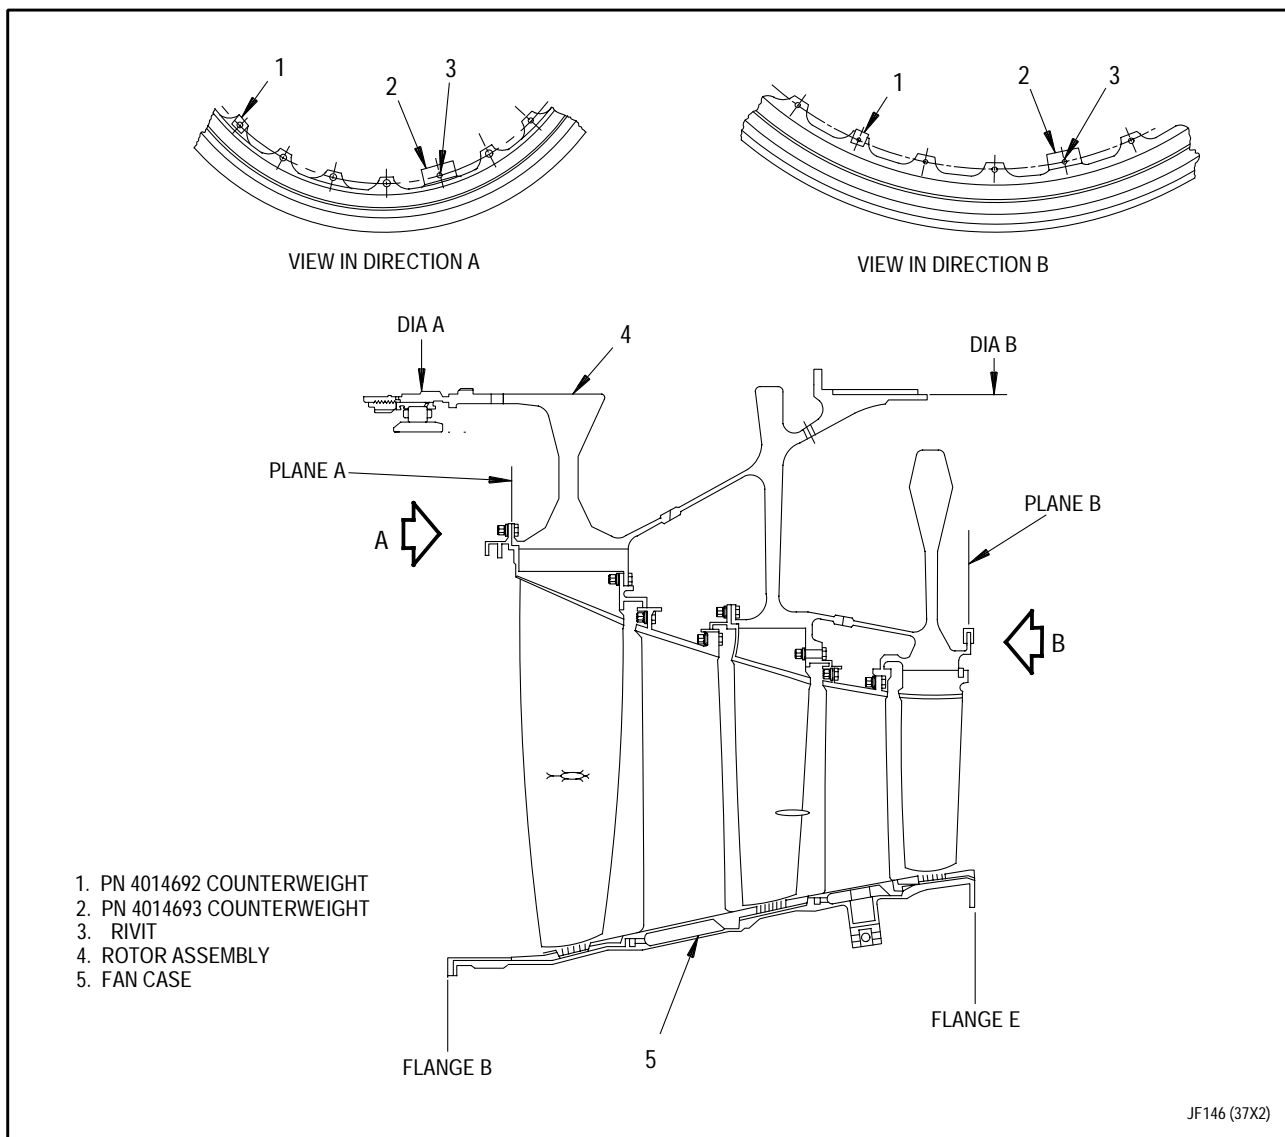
Front Compressor Rotor and Stator Assembly - Dynamic Balancing Machine
